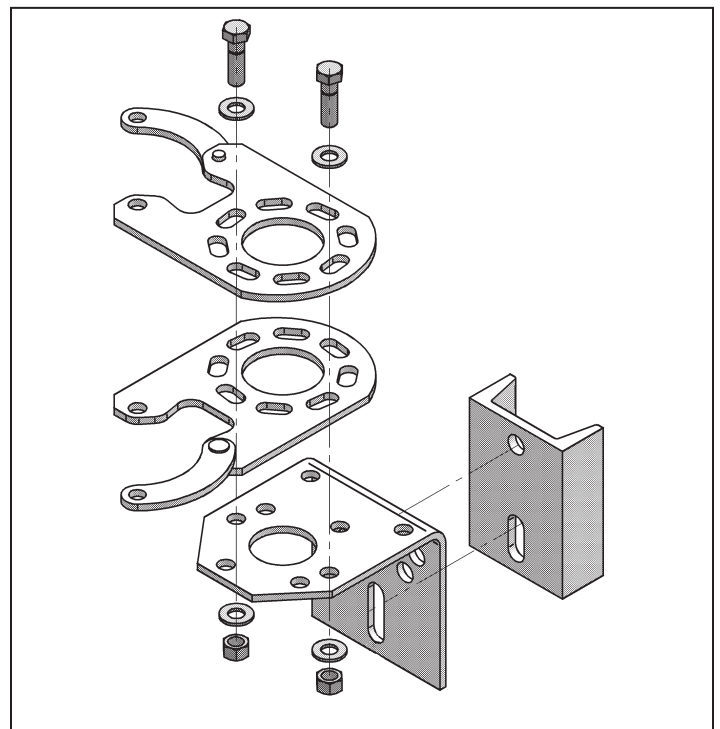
Exploded view of the stop plates and foot-bearing assembly.
